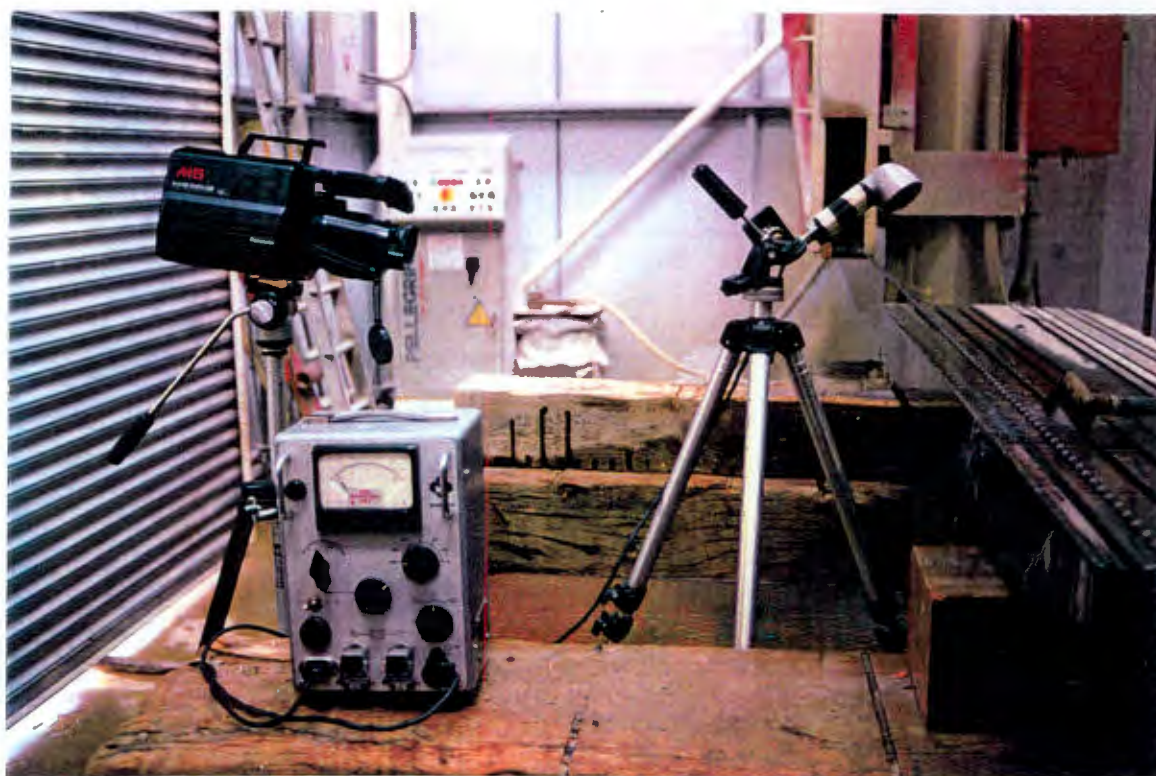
Diamond wire rotation measurement using a stroboscope
